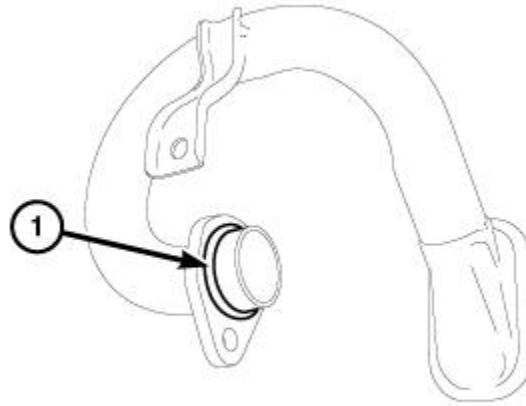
Oil Pump Pick-Up Tube O-Ring Seal
